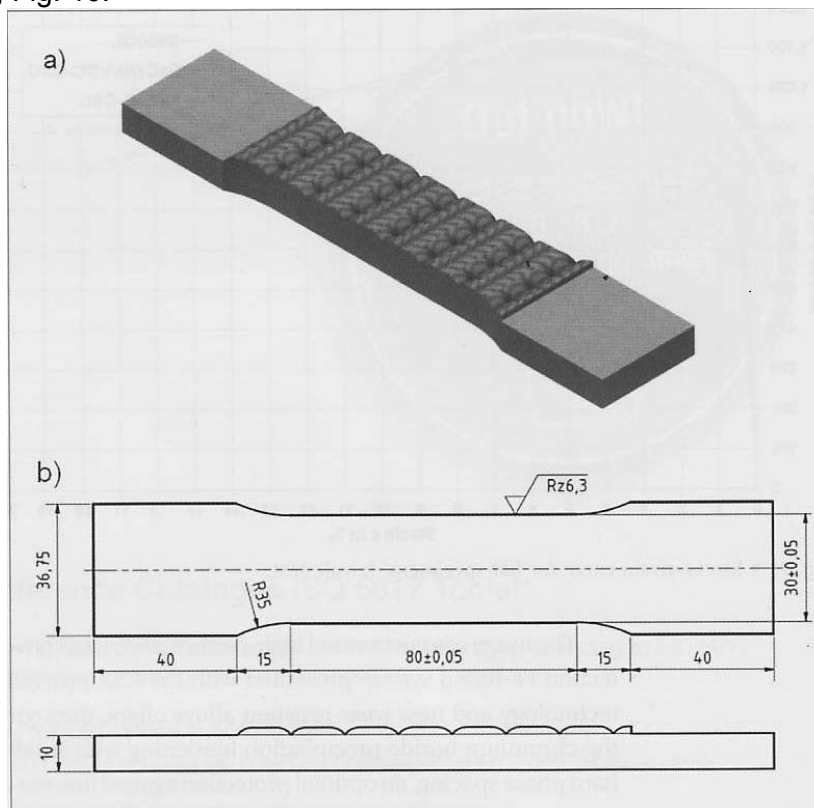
Flat tensile test specimen geometry: a) 3D-CAD-Model (isometric), b) Engineering drawing
